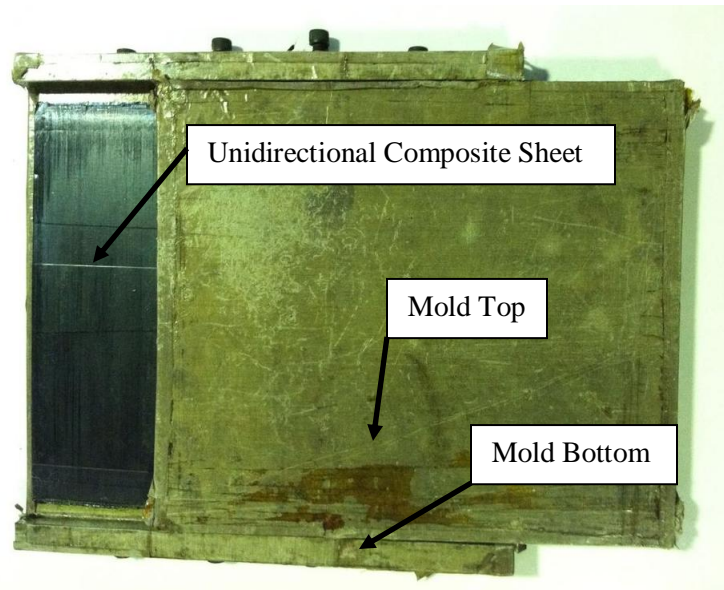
35.6 cm  $\times$  35.6 cm plate mold
